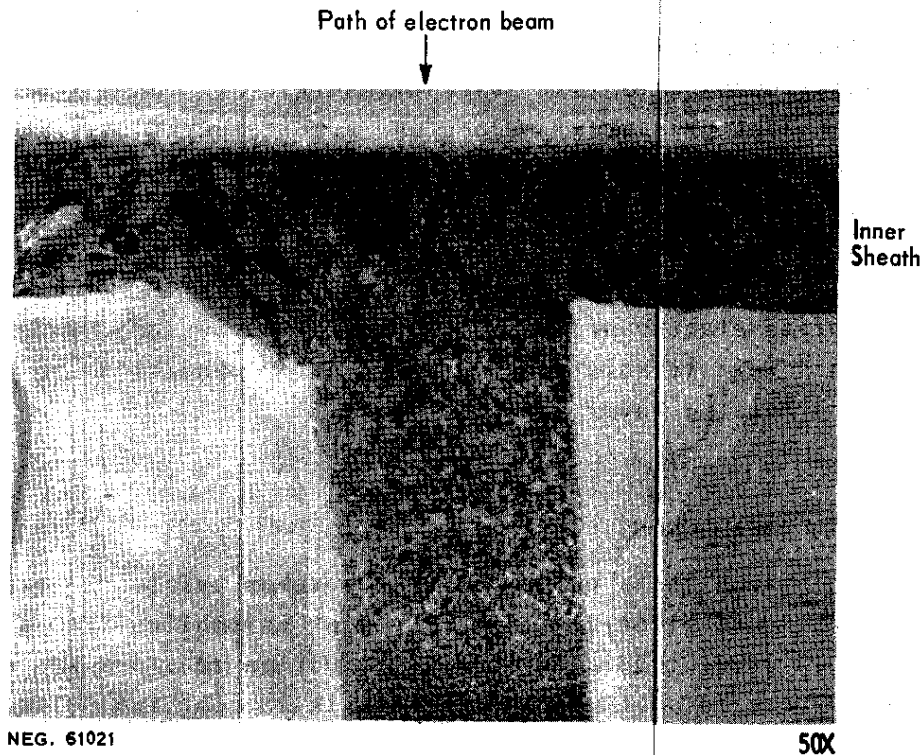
ZIRCALOY SHEATH WITH FULLY WELDED RIB AFTER SWAGING
